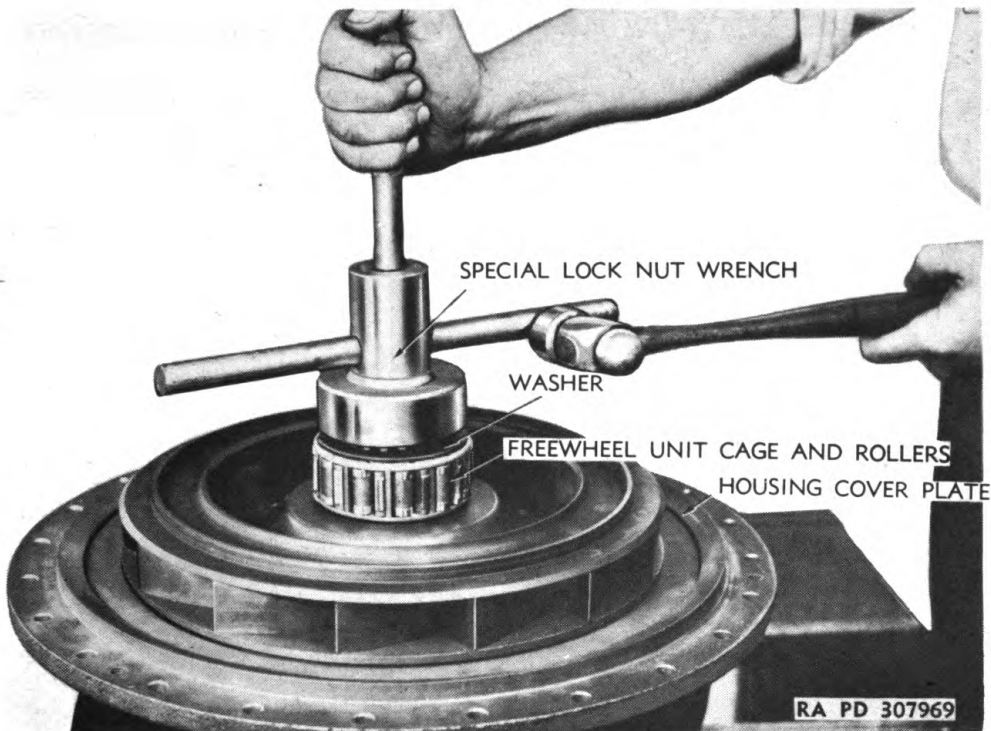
Removing Input Shaft End Nut, Using Wrench 41-W-3160
